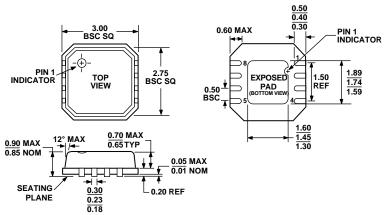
8-Lead Lead Frame Chip Scale Package Dimensions shown in millimeters
